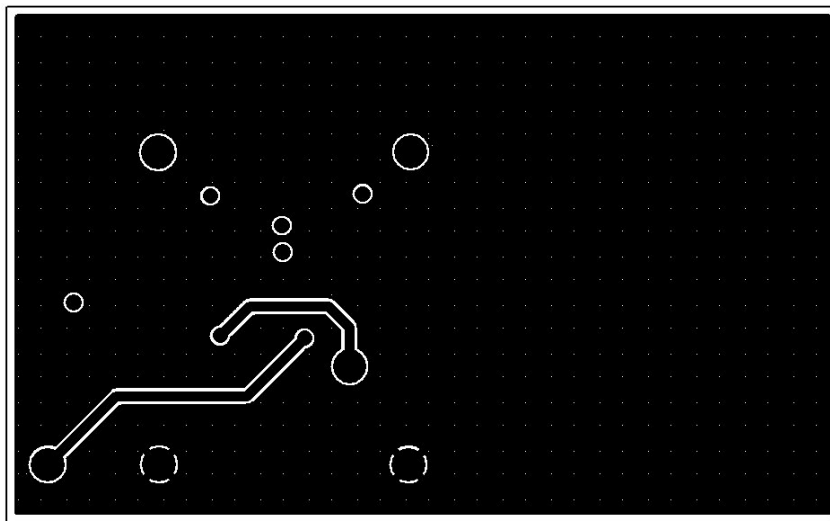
SP6683 PC LAYOUT BOTTOM SIDE
